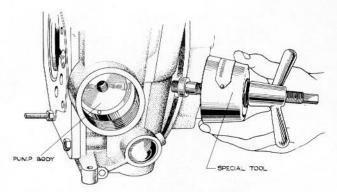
Extracting the pump body from the casing using special tool Churchill L183
